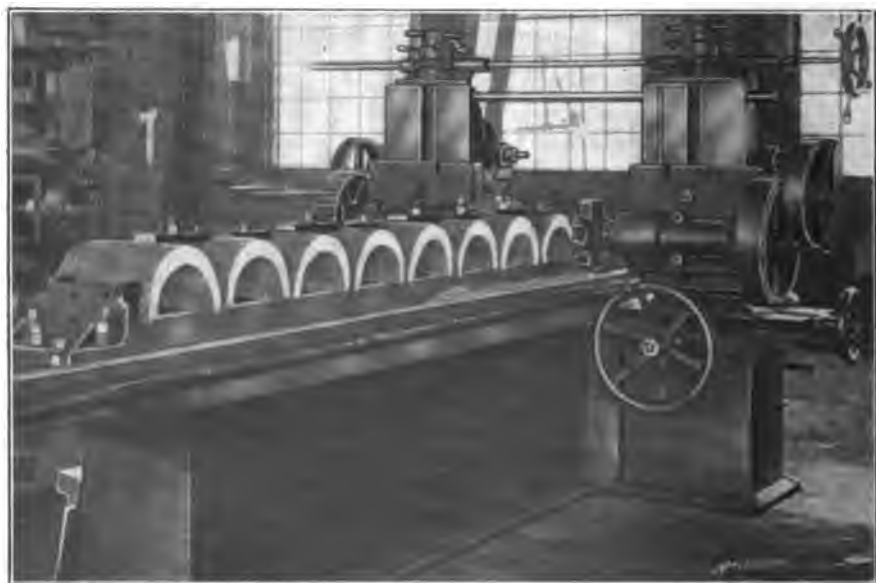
Finishing the Ends of a Gang of Crown Brasses in a Double-spindle Milling Machine
